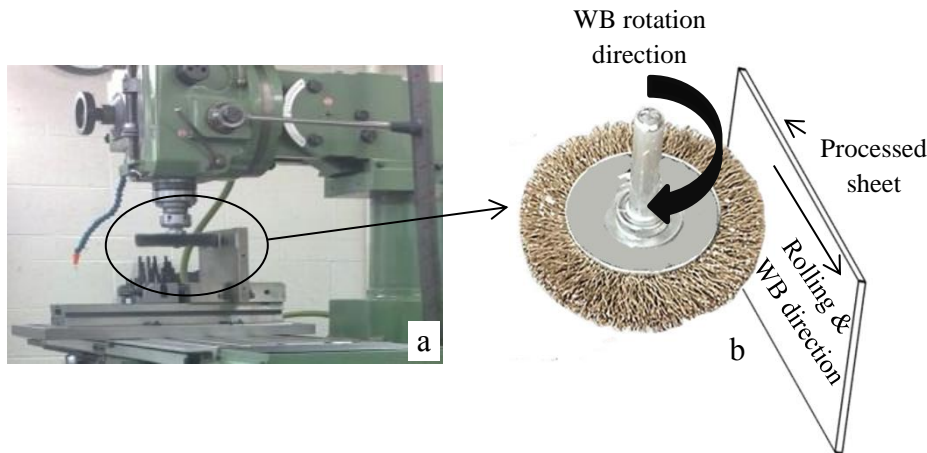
(a) Set up for wire brushing on a milling machine and (b) schematic illustration of the brass wire brush during rotation on the processed sheet.
